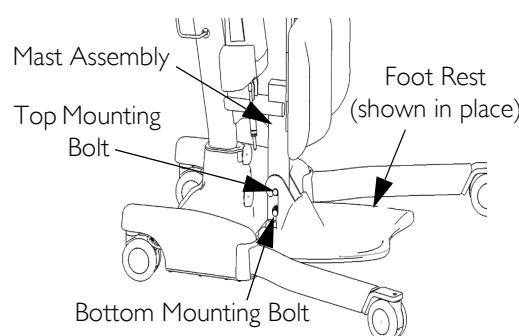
Assembling the Foot Plate to the Mast Assembly
